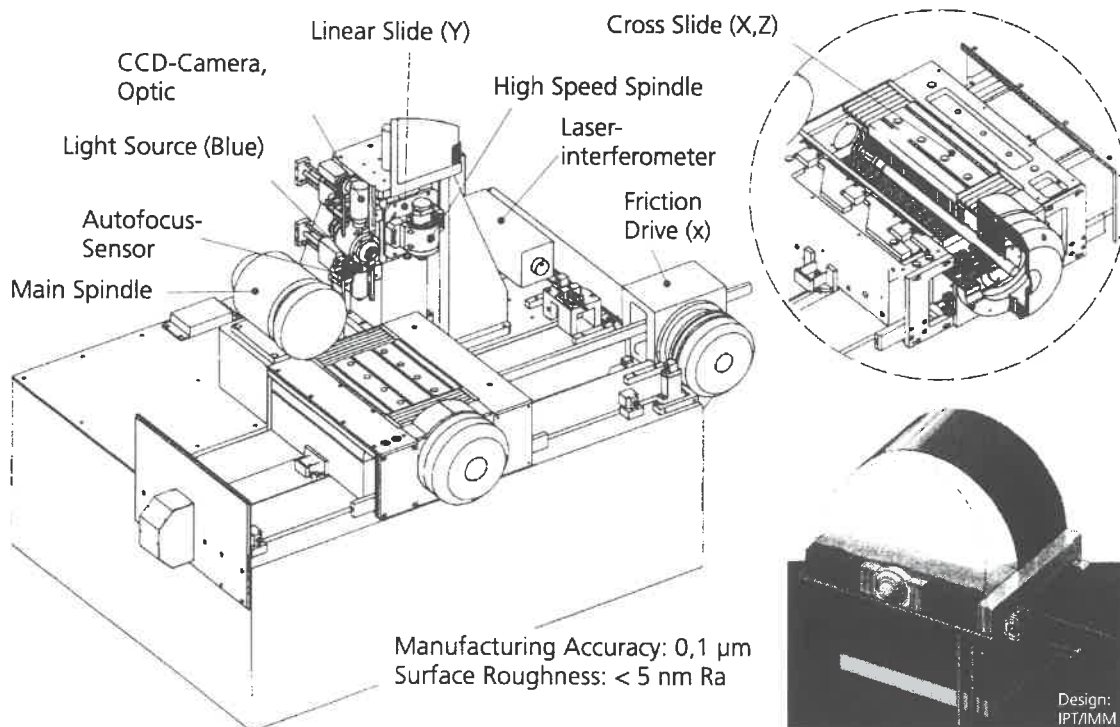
Ultraprecision Milling Machine 'UPM' (Fraunhofer IPT)
